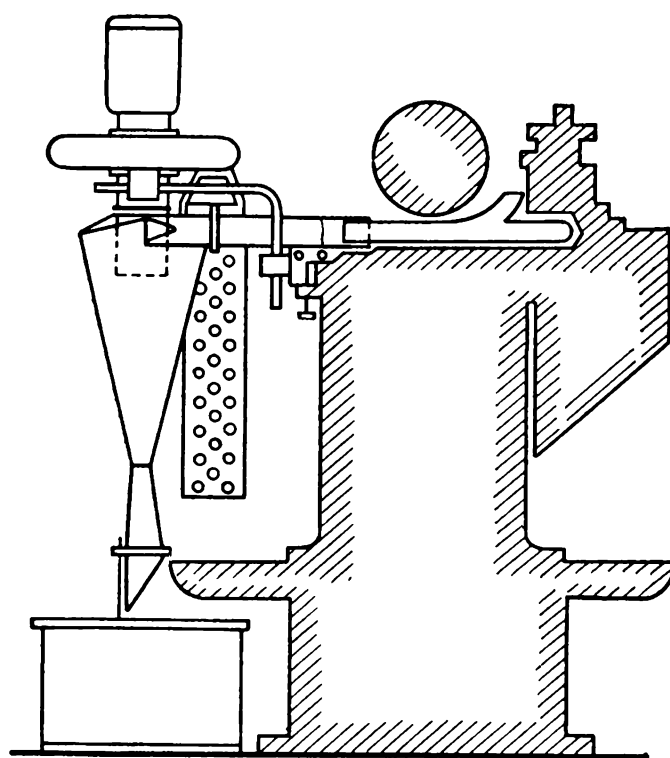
Chip and dust removal from the zone of cutting in a turning lathe.
